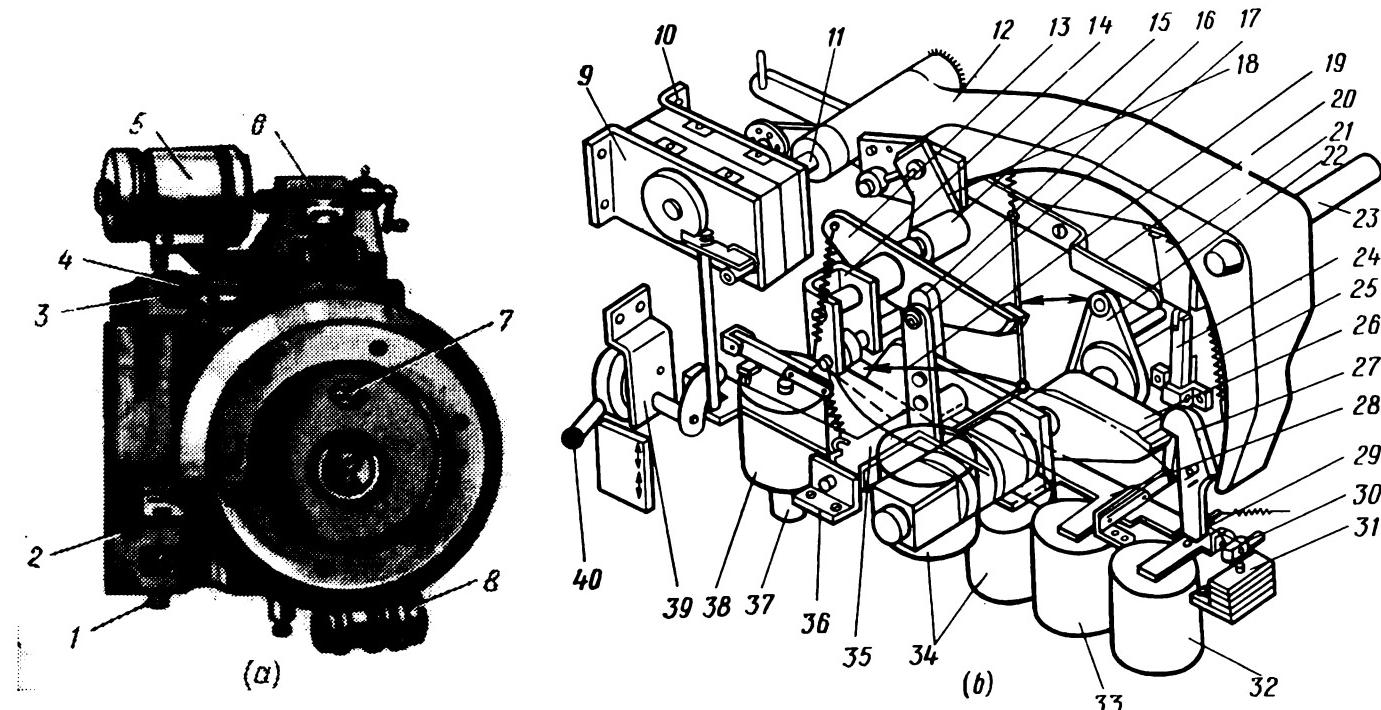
Spring-loaded motor-driven operating mechanism ППМ-10
